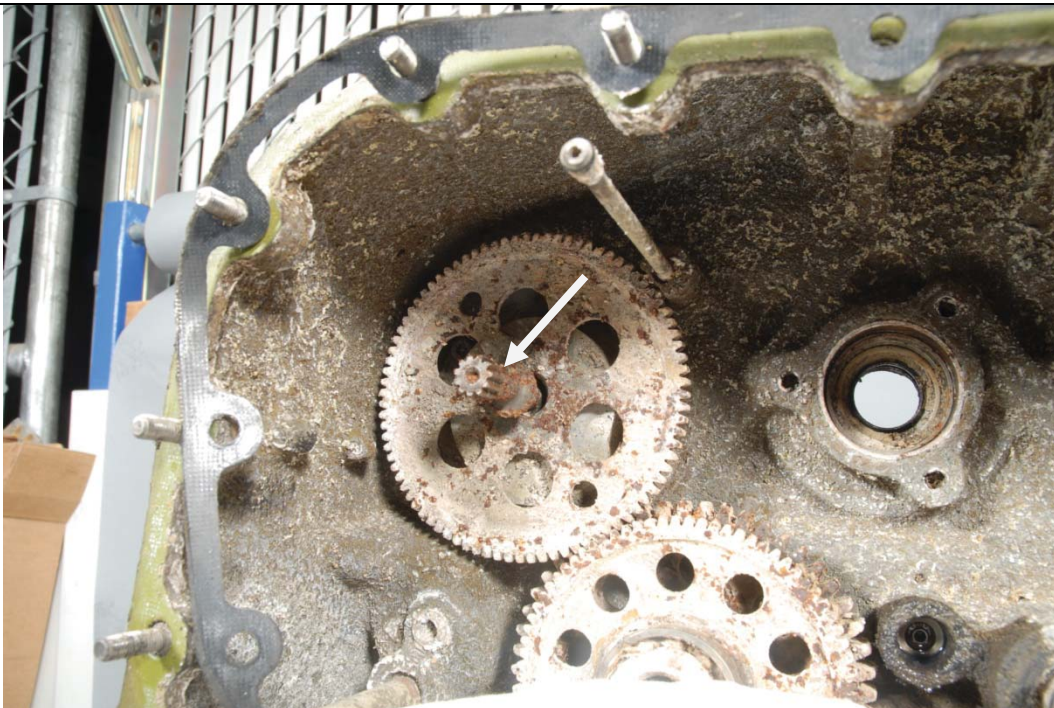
P-79001C, Starter/Generator Drive Gearshaft Assembly
